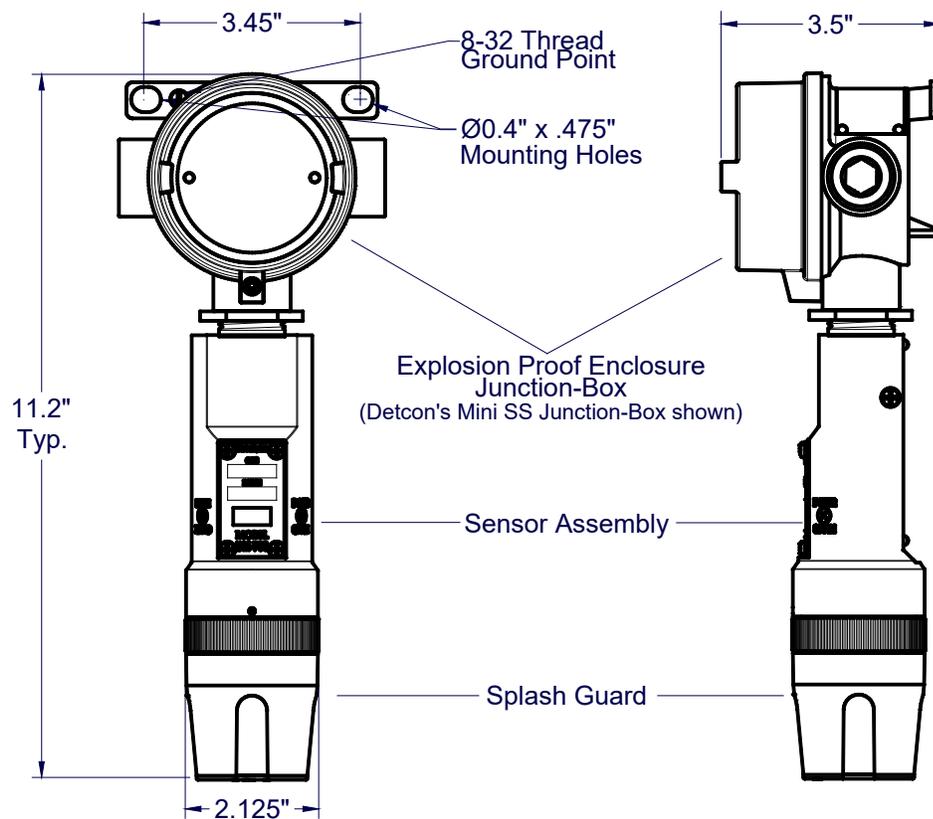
Outline and Mounting Dimensions (Mini Stainless Steel Junction Box)
